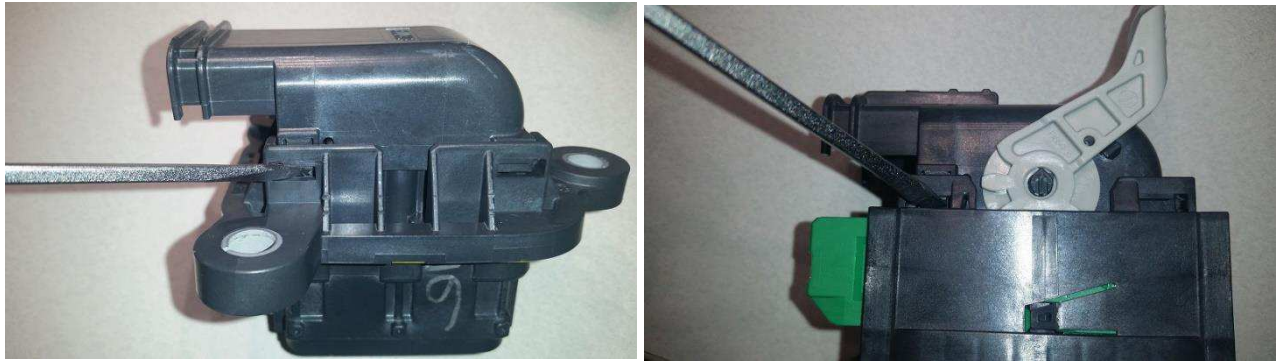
Tool Insertion Points for Wire Dress Removal (one each side)
